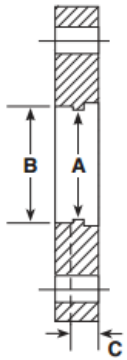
A&N Corporation ISO-LFB Socket Weld Flange
